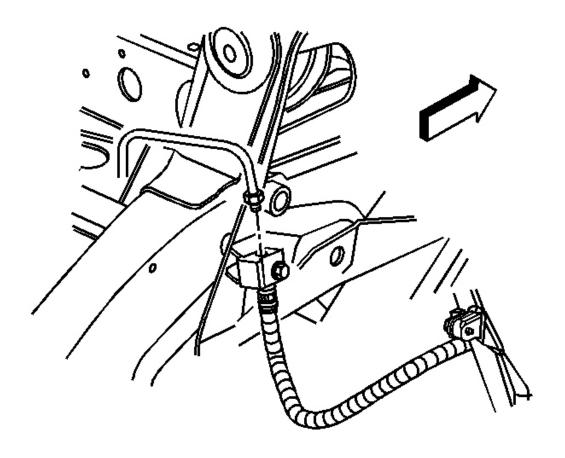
Installing Brake Pipe To Brake Hose Courtesy of GENERAL MOTORS CORP.
